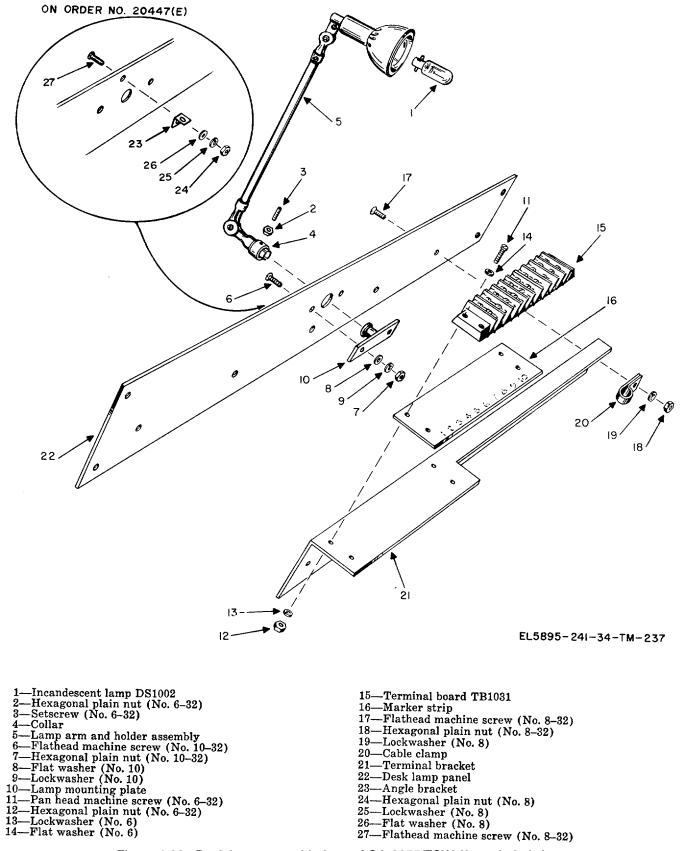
Desk lamp assembly (part of OA-2055/FSW-8), exploded view.
